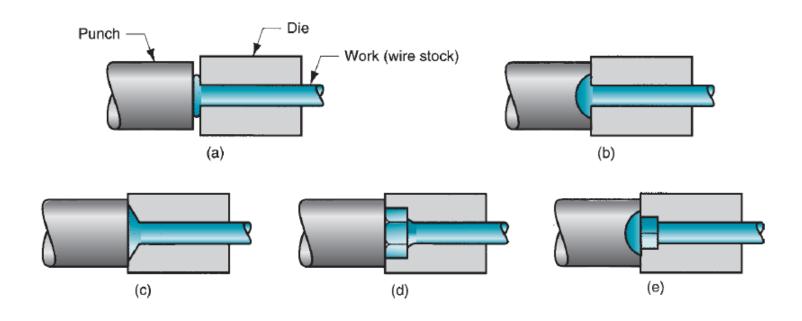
Examples of heading (upset forging) operations: (a) heading a nail using open dies, (b) round head formed by punch, (c) and (d) heads formed by die, and (e) carriage bolt head formed by punch and die.
